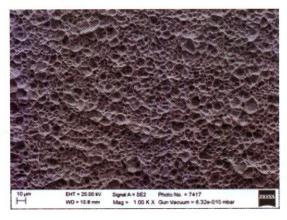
Ductile fracture surface of tensile tested Nb-SS brazed specimen
